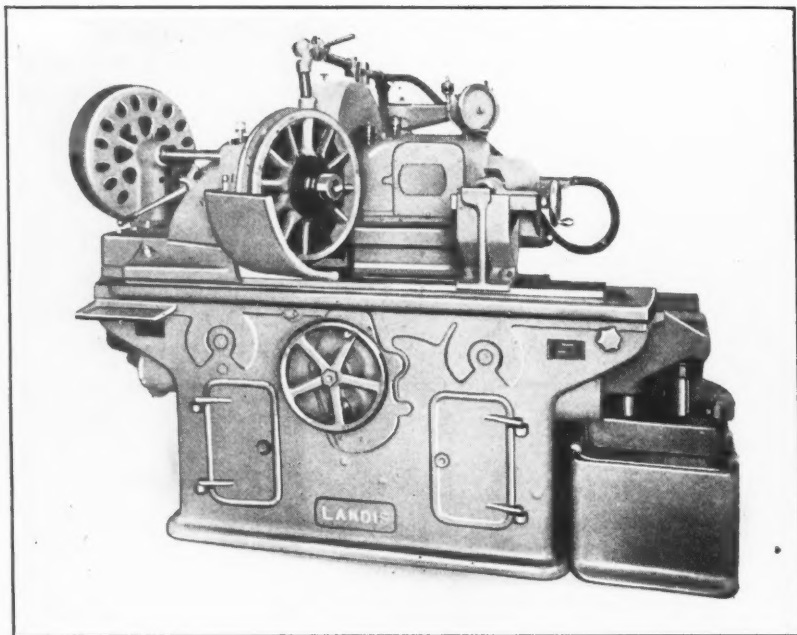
Landis Brake-drum Grinding Machine with Wheel in Place
